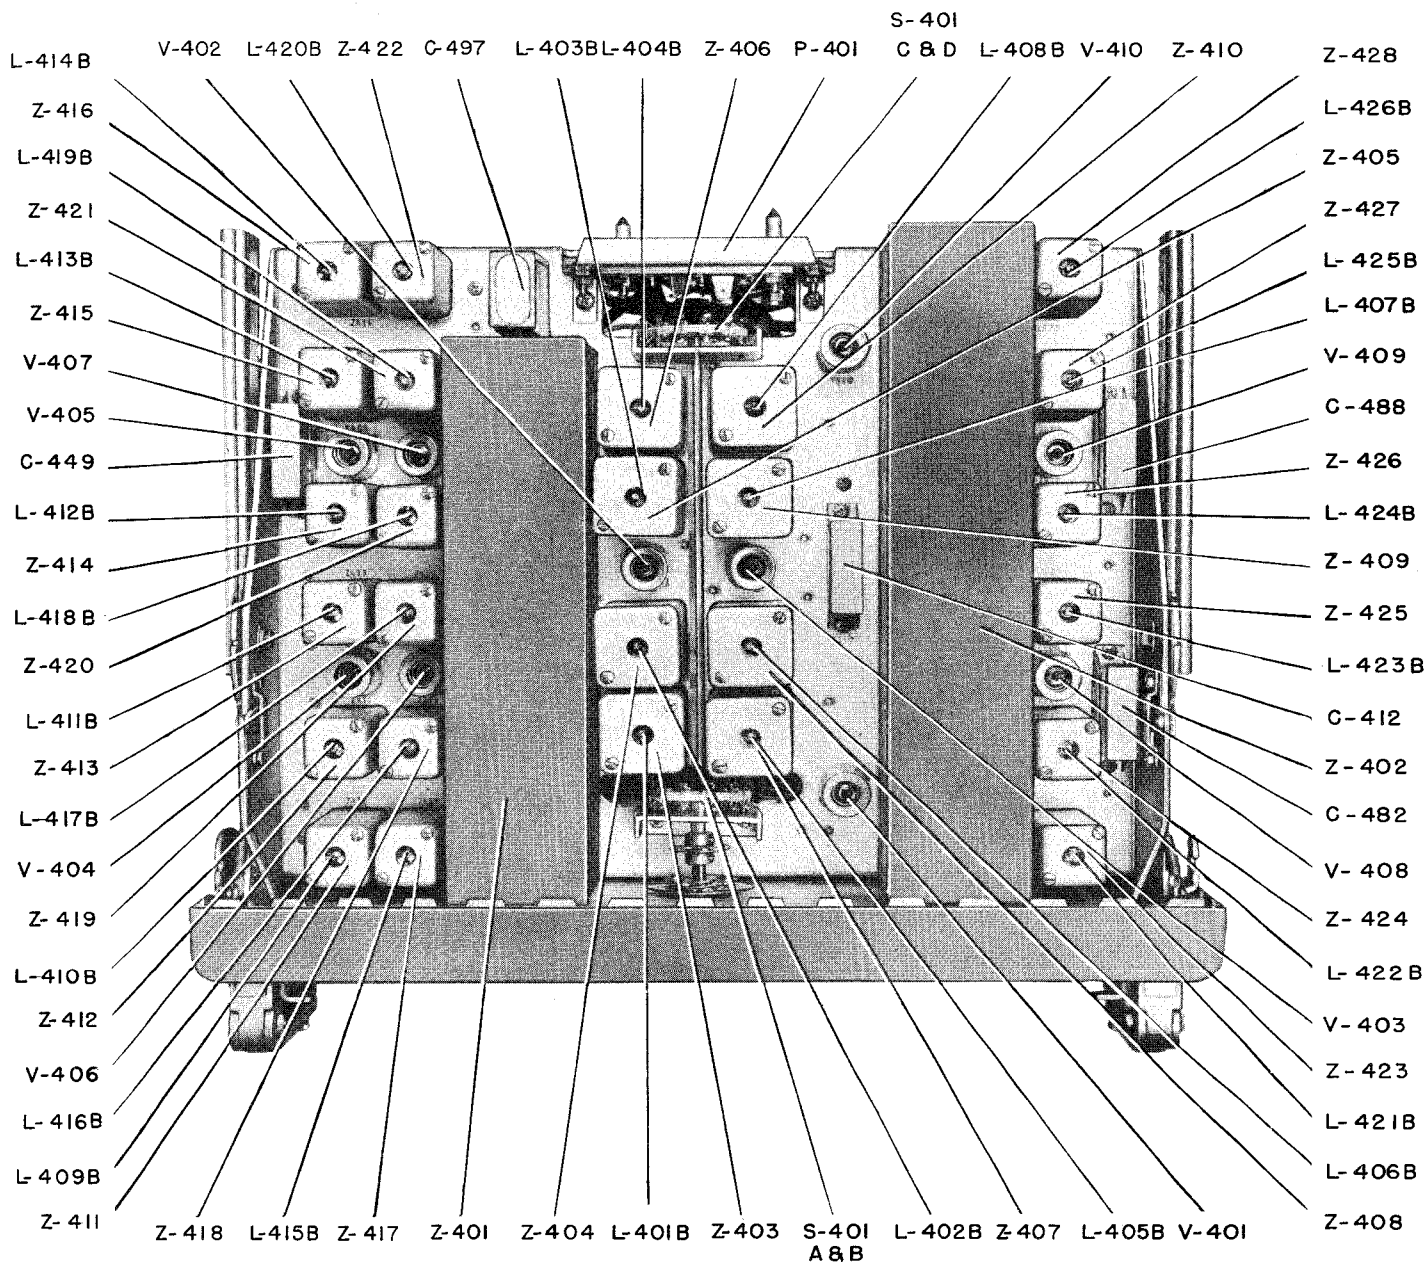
Component Locations Top of Chassis, Filter Assembly F-99/FRR-24
